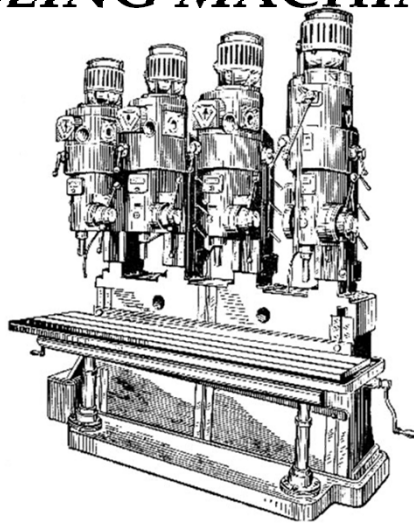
Gang, multiple-spindle drilling machine.
